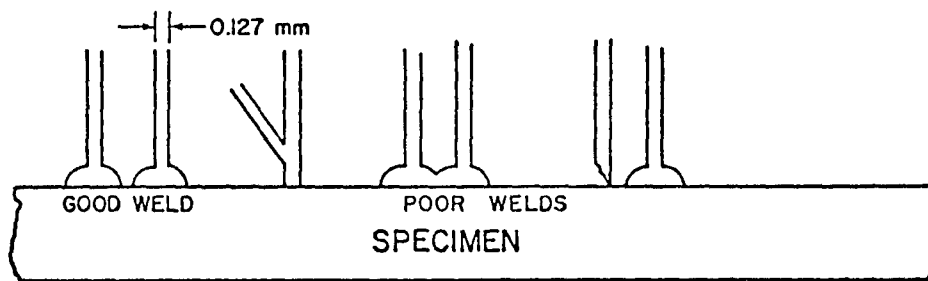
Examples of a Good Weld and Three Defective Welds.
